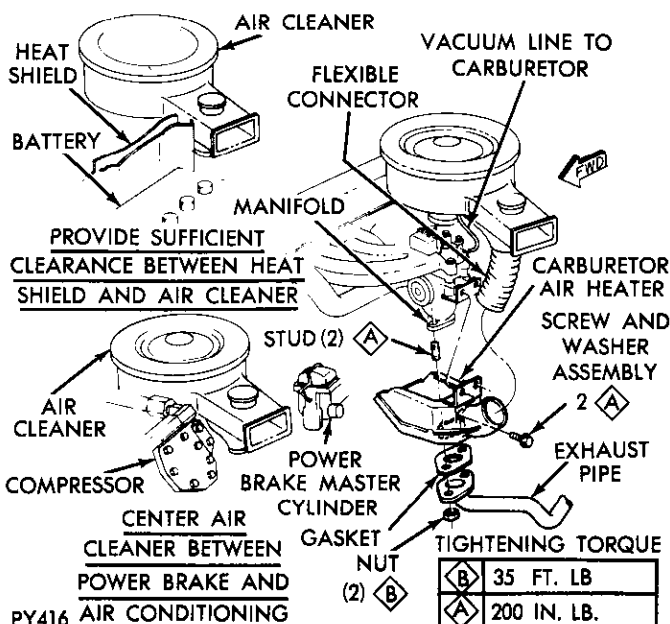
Carburetor Air Heater, Six Cylinder Engines
